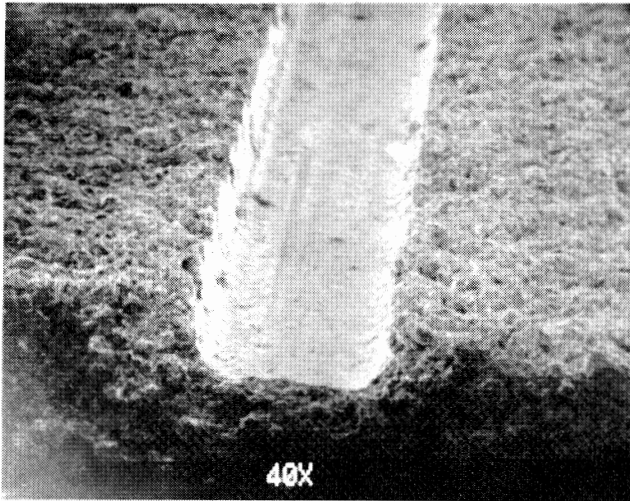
Showing Sharp Groove Edges with No Corner Damage or Thermal Cracking in Material "E."
